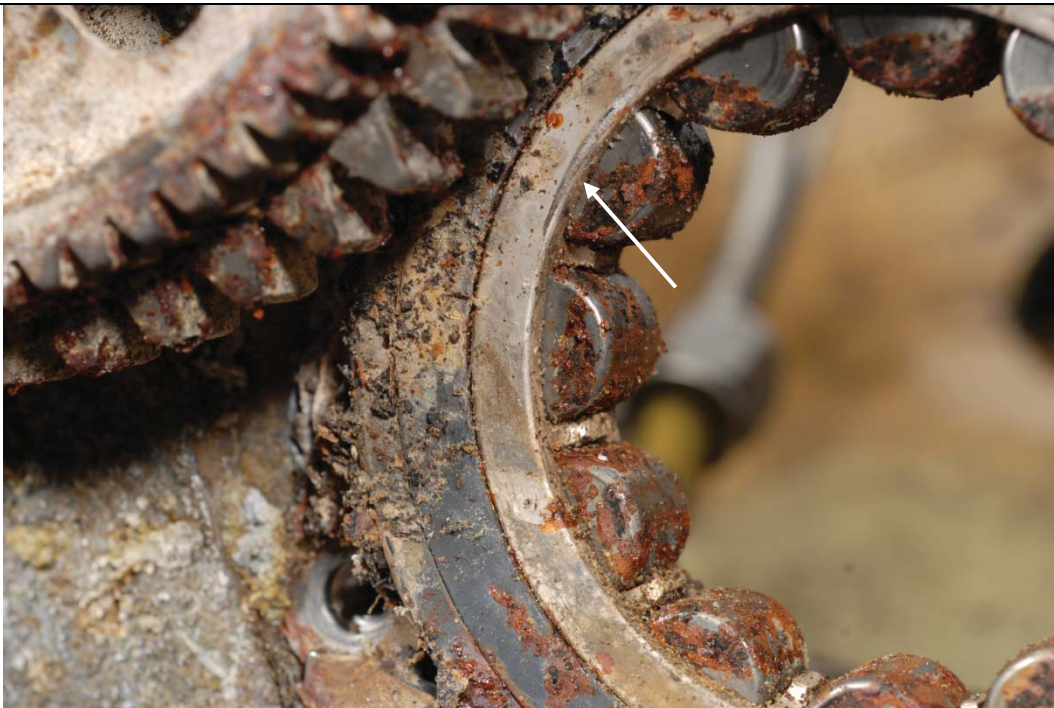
P-79001C, Propeller Shaft Aft Ball Bearing
